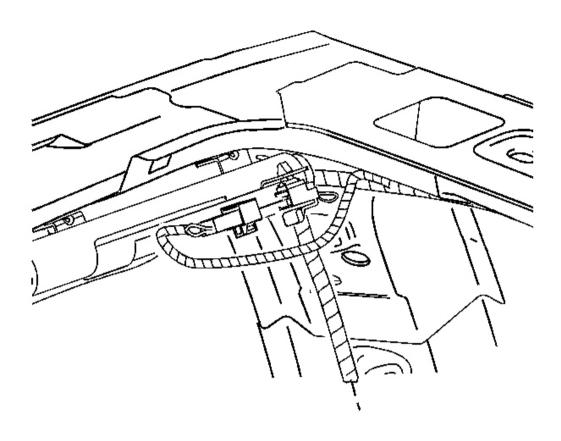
CPA & Roof Rail Module Connector Courtesy of GENERAL MOTORS CORP.
